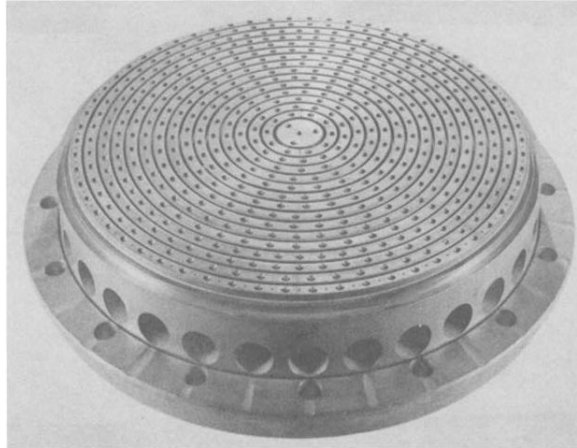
Injector with 90° self-impinging (fuel-against-fuel and oxidizer-against-oxidizer)-type countersunk doublet injection pattern. Large holes are inlets to fuel manifolds. Pre-drilled rings are brazed alternately over an annular fuel manifold or groove and a similar adjacent oxidizer manifold or groove.
